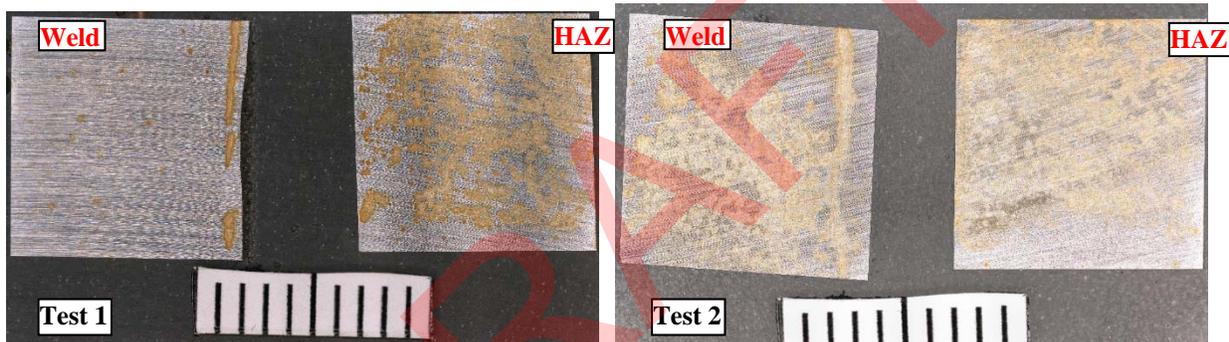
Low magnification morphology of Weld-HAZ couple Sample 3.
